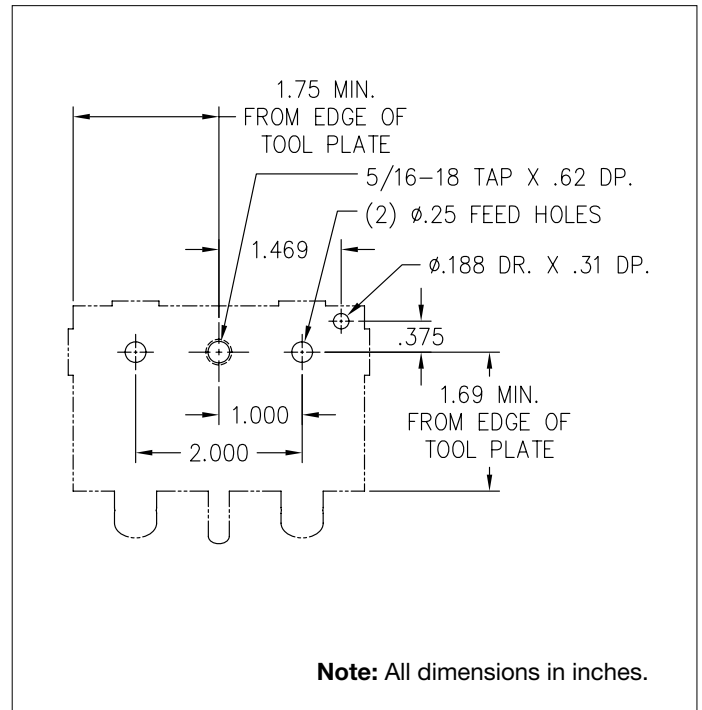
, Mounting Hole Pattern, MCR21 Receiver without Pilot Operated Check Valve
